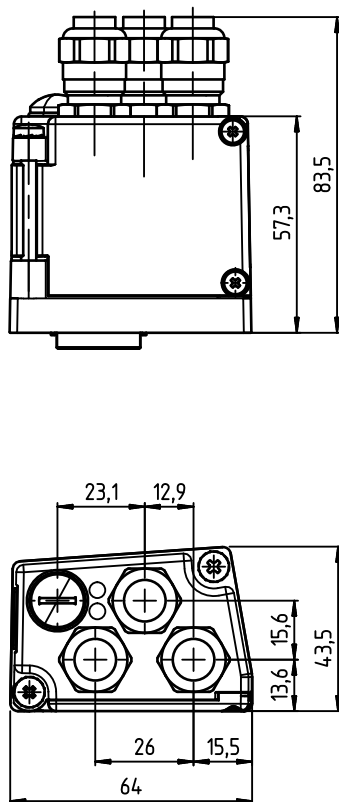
Dimensioned drawing BPS with MK 304 connection hood
